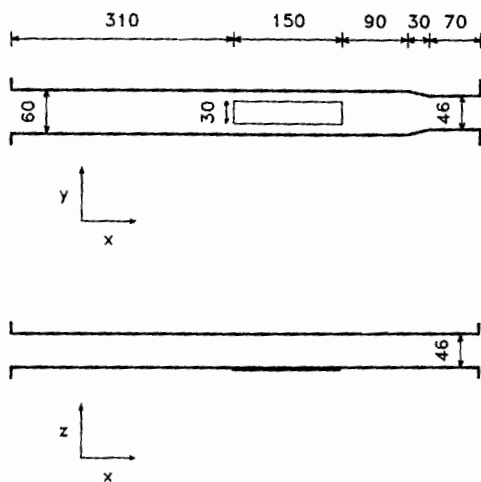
Nozzle shape of a prototype bubble jet printer. Unit: μm .
